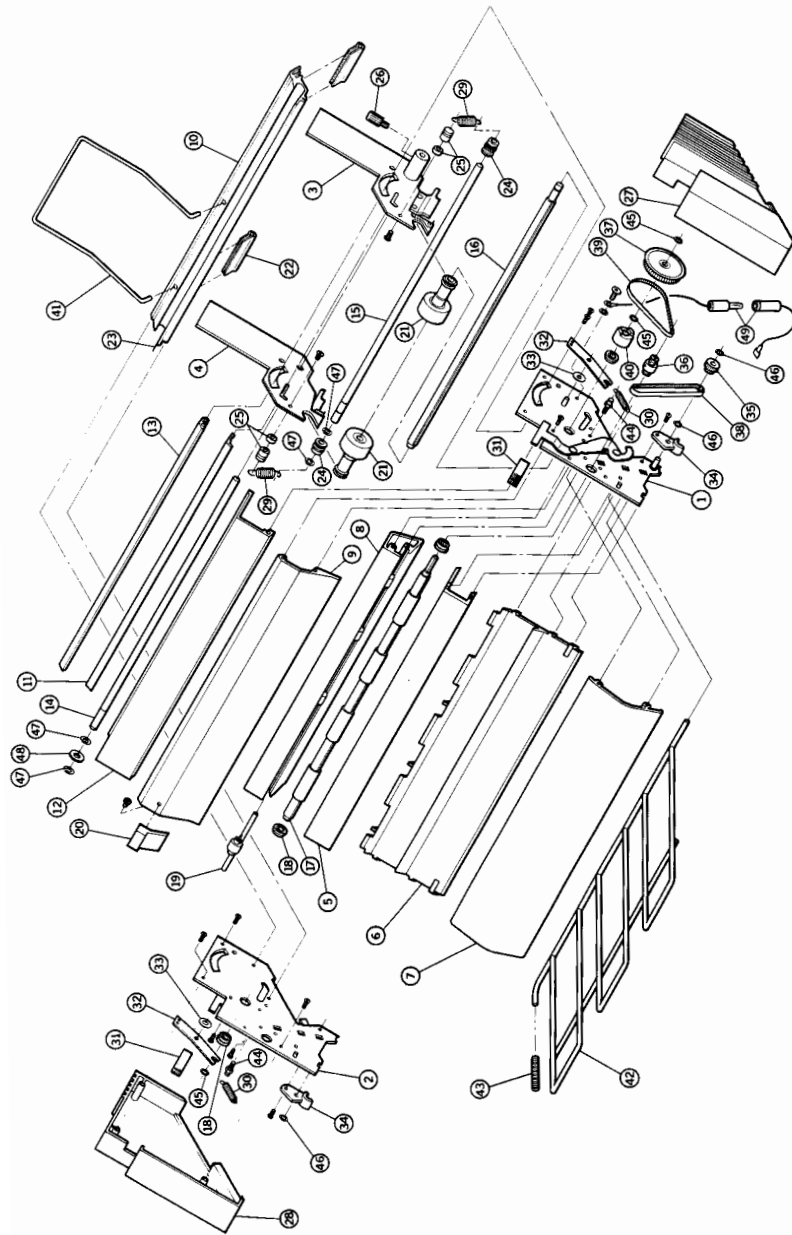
29340S Sheet Feeder—Exploded View.
